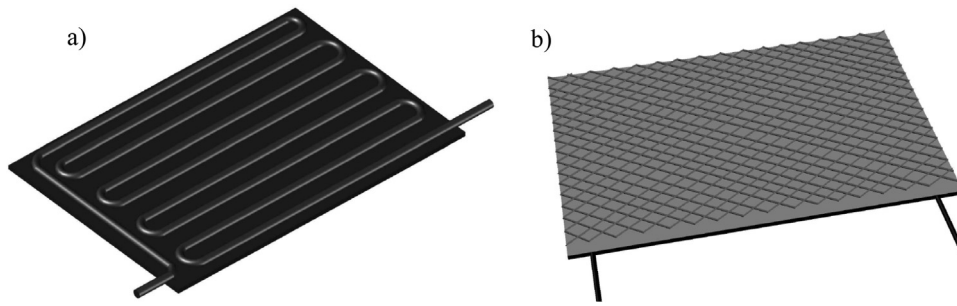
a) Bottom tube sheet and b) Top embossed surface [6].
